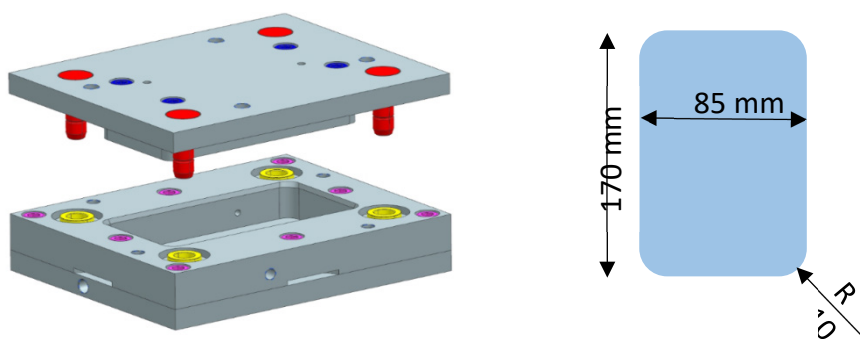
Hand-compression mould as assembly (left) and press area inside (right).
